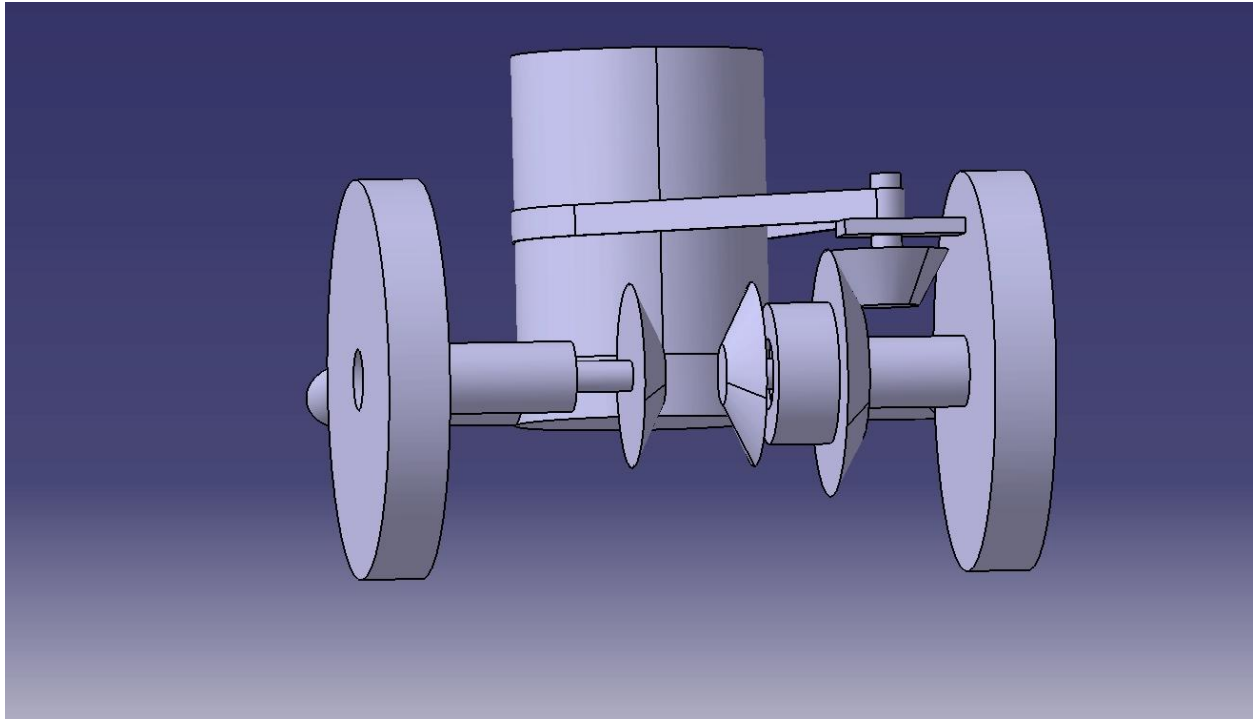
Figure of 2nd Sub Assembly for Product Design
